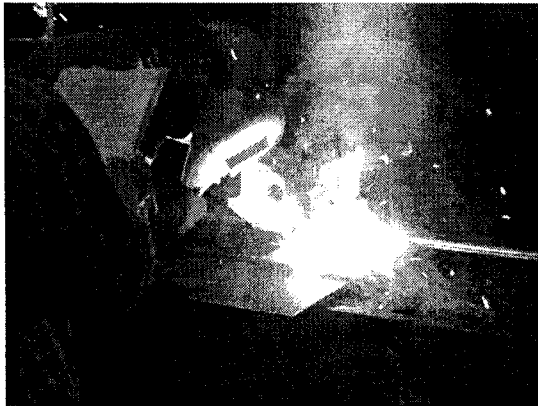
Transverse Fillet Weld Test Specimens
